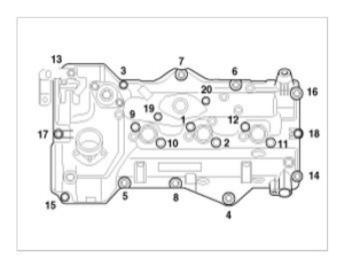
Identifying LH Cylinder Head Cover Mounting Bolts Tightening Sequence Courtesy of HYUNDAI MOTOR AMERICA
